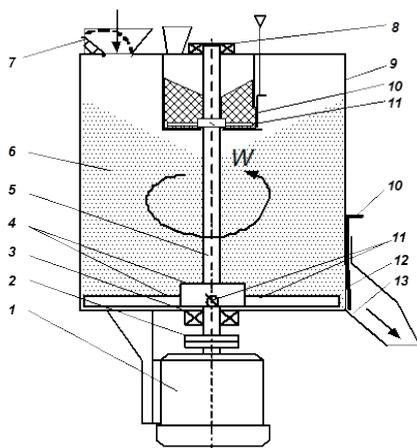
Scheme of a two-staged dry materials mixer: 1– electric motor; 2– coupling; 3– lower bearing support; bunker operational stock of components; 4 - paddle mixer; 5– shaft; 6– mixed material; 7– loading neck; 8– upper bearing support; 9– mixing chamber (capacity); 10– gate; 11– blades; 12– discharge hole; 13– unloading tray
